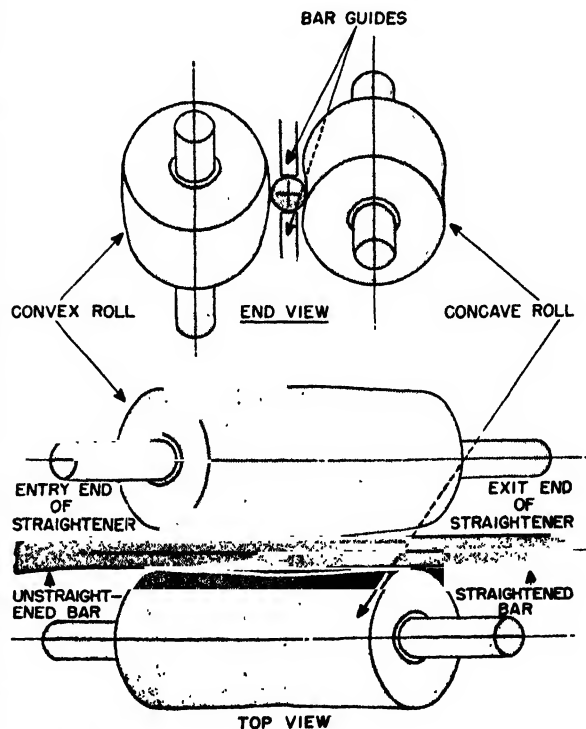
24. Sketch showing end and top views of a typical two-roll unit for straightening rounds.
